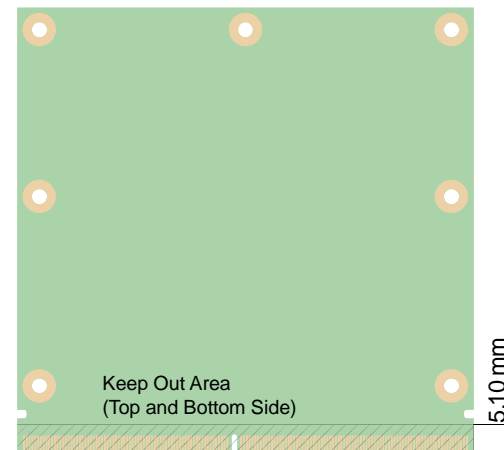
Module Edge Finger Keep Out Area (82x80mm Module)
